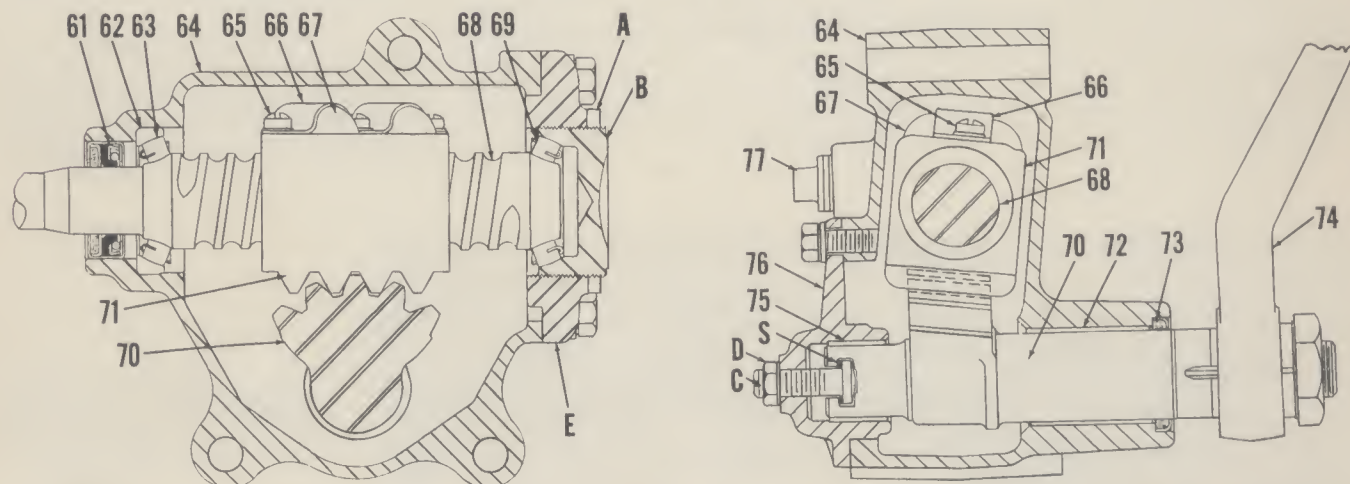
Saginaw steering gear (recirculating ball type) as used on later production series 90 and 99 tractors.
